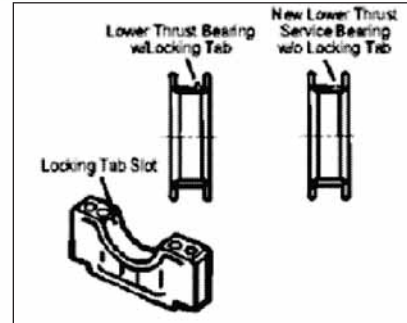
The 7.3L Navistar diesel uses a modified thrust main bearing in the Number 5 position. The bearing has been modified by removing the locking tab.
